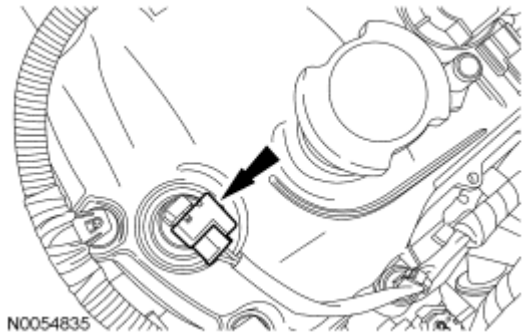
Locating LH VCT Solenoid Electrical Connector
